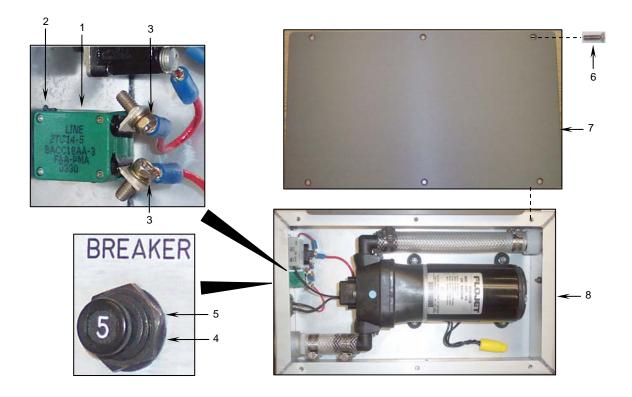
Installing the Sink Fill Pump Assembly Circuit Breaker.
